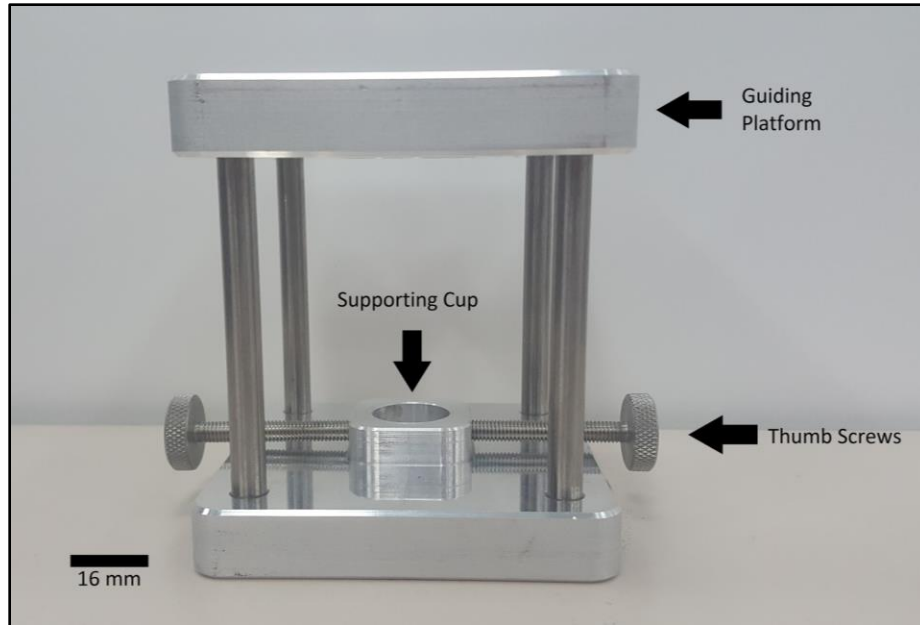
The above image is the final prototype of the stand used to hold the allograft in place while external threads are created. The guiding platform ensures axial alignment. The allograft would be inserted cartilage side up into the supporting cup, and the thumb screws would tighten around the allograft.
